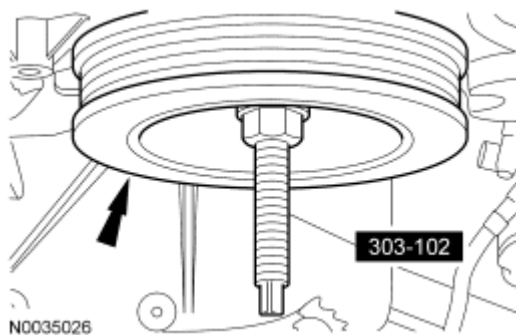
Installing Crankshaft Pulley Using Special Tool (303-102)
